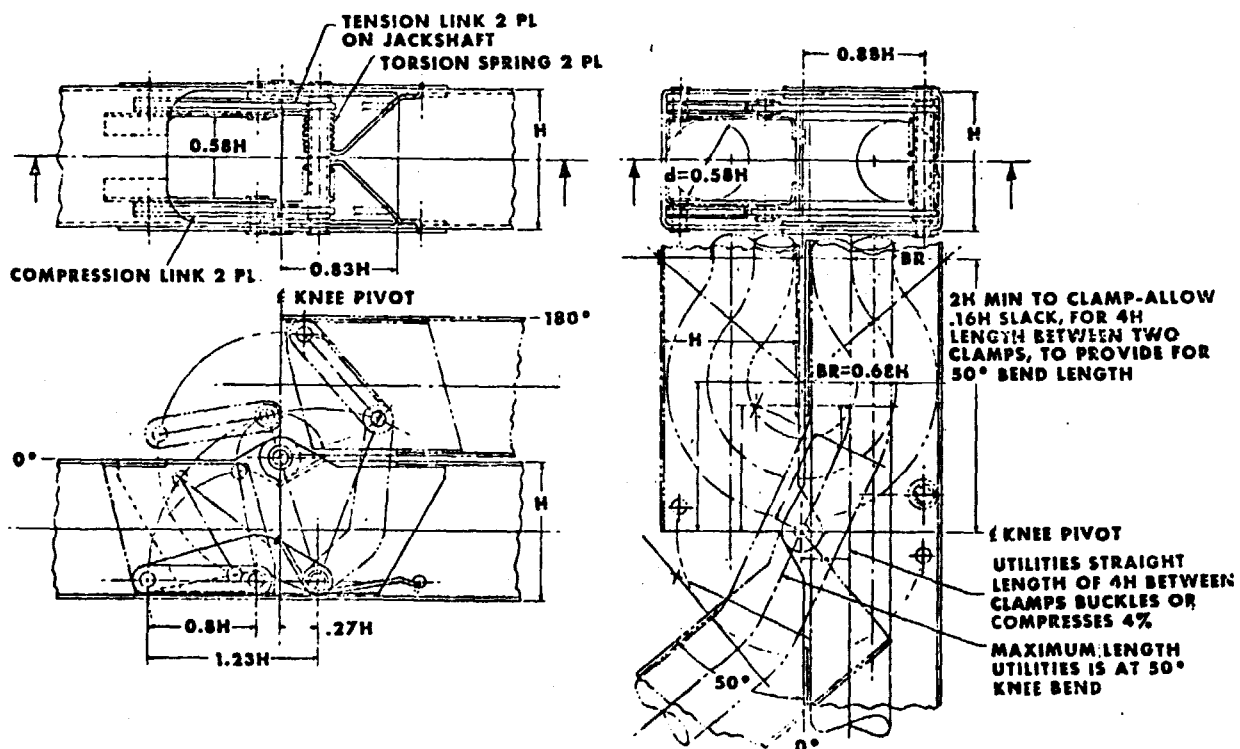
BOX TRUSS KNEE JOINT CONCEPT FOR INTERNAL UTILITIES ROUTING
